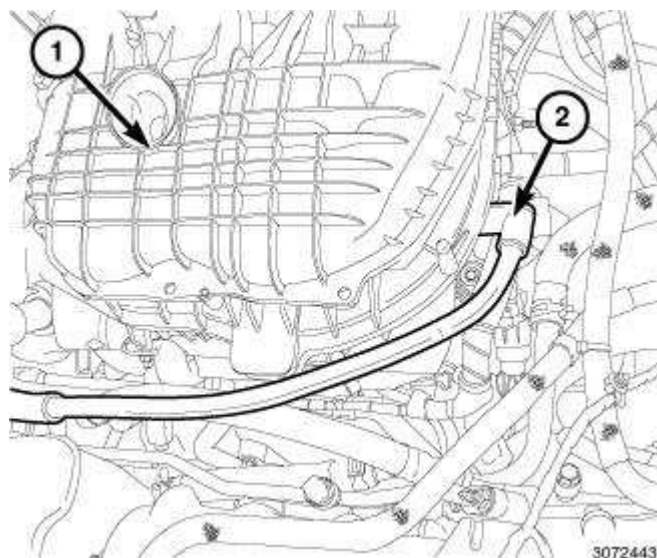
Fresh Air Makeup Hose At Rear Of Intake Manifold
